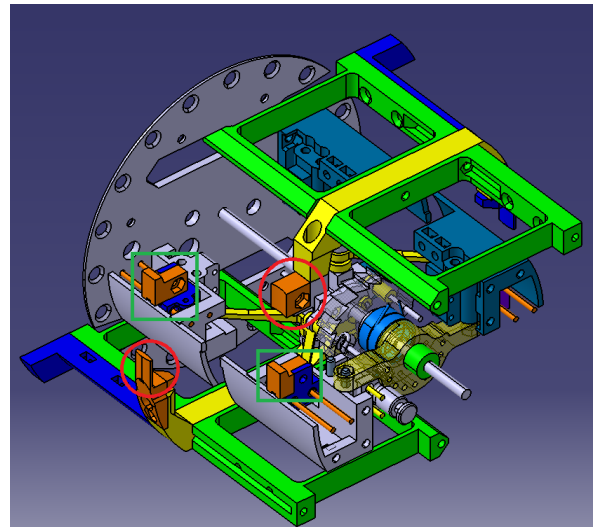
Boom spool internal mechanism used for boom root deployment with two larger sliders (yellow-green) and the two boom flange interfaces (green framed orange parts) and the two boom shell interfaces (red circled orange parts) in deployed configuration.
